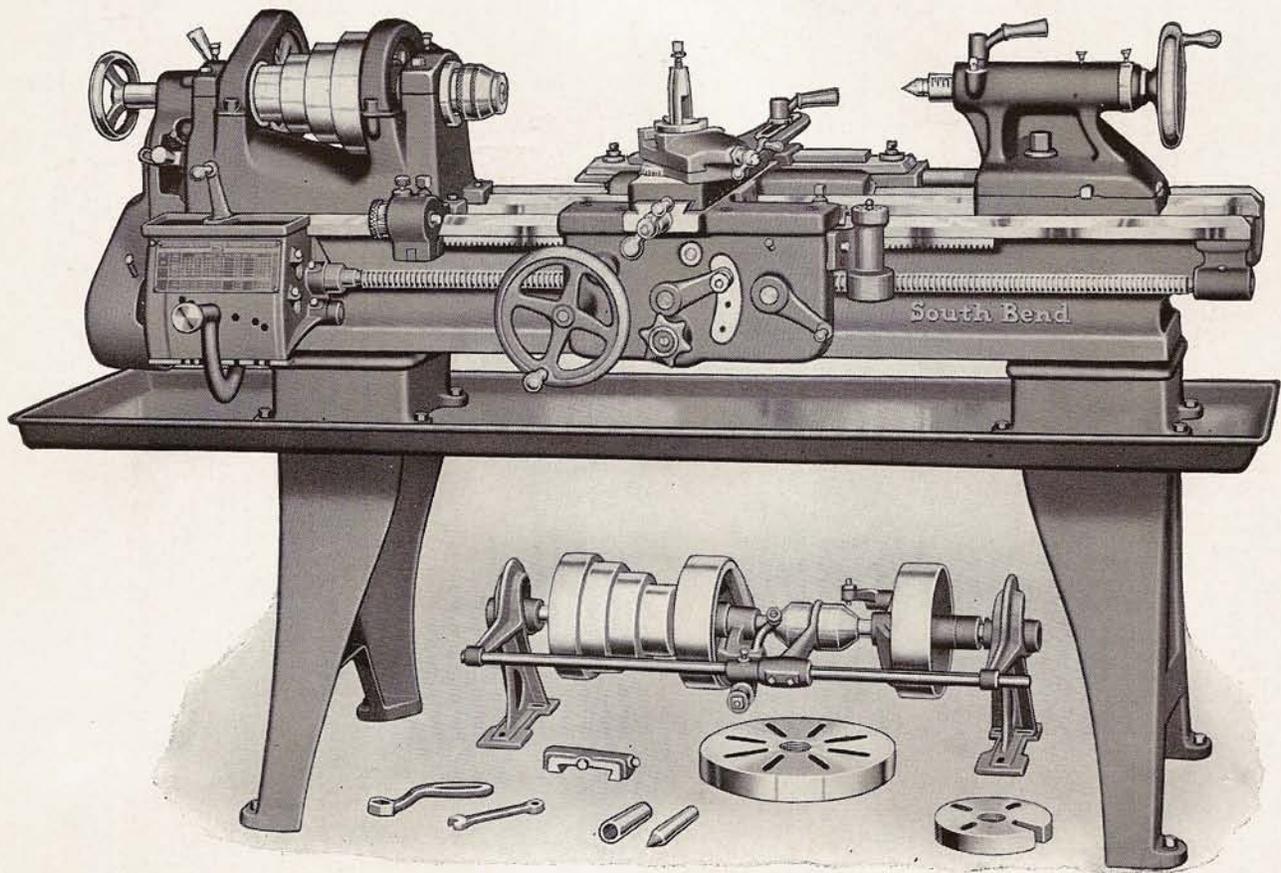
Cat. No. 8013-B, 13" x 5' Series "R" Tool Room Quick Change Gear Countershaft Drive Lathe complete as shown...\$765.00
